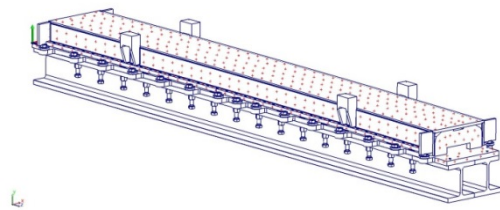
SIS100 dipole yoke mock-up with added marks on the welding apparatus
